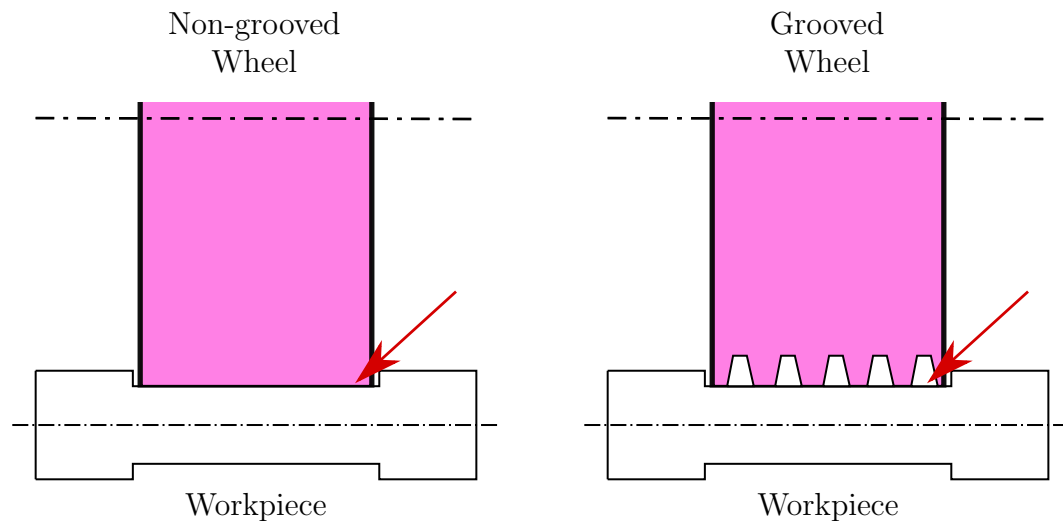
The difference in the amount of wheel in contact with the workpiece for grooved and non-grooved wheels
